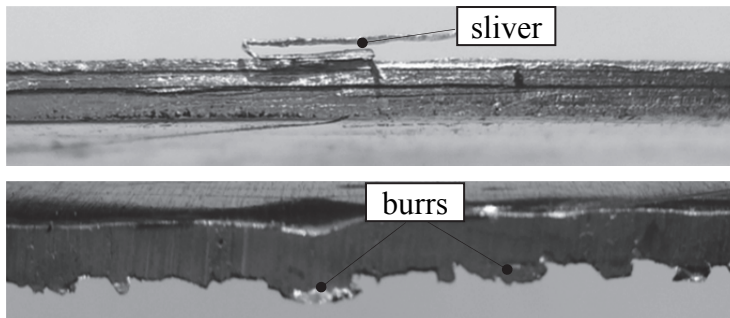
A typical defects of the workpiece's sheared edge
